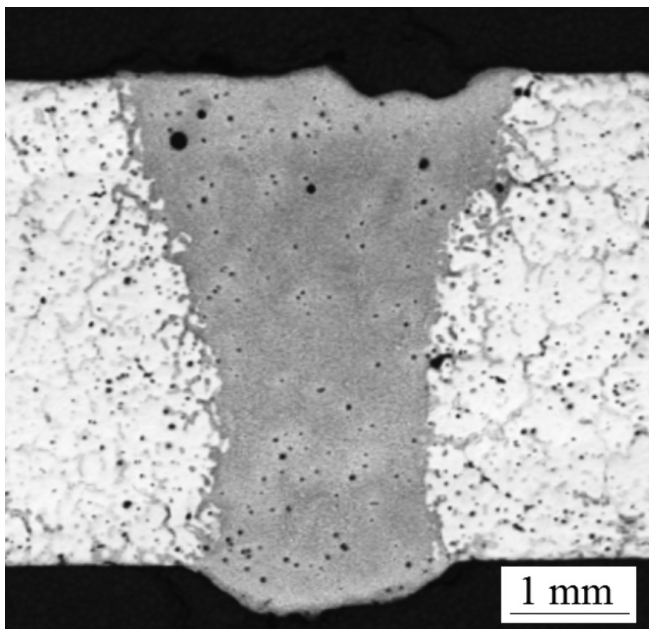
The macrostructure of joint welded by 522 method
